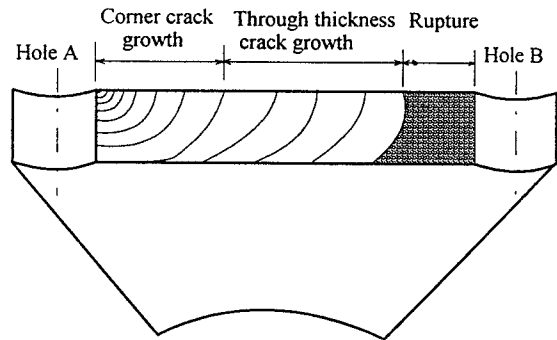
Fracture surface between the hole A and the hole B in failed disc
